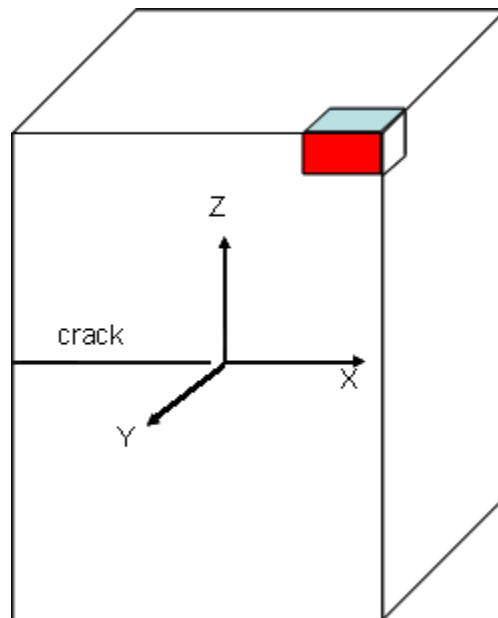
X, Y and Z Faces of Single Edge Notch Tension Specimen for Metallographic Inspection
